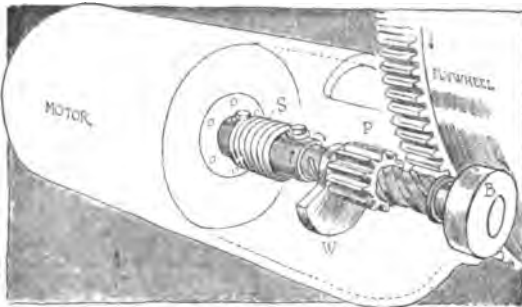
Automatic method of applying starting motor to drive fly wheel.
